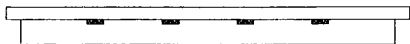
Configuring Horizontal Framing Members with Fixture Sockets.
